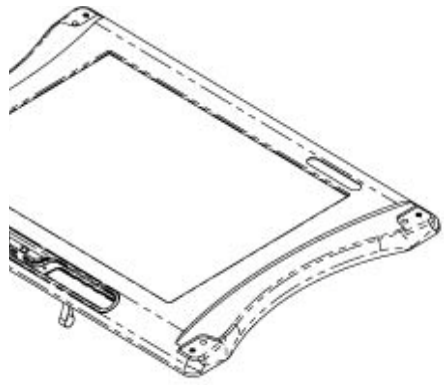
A1 T-8000 Top Assembly (A1A1)
